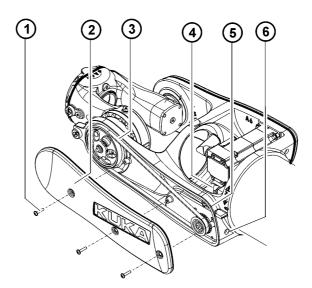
Measuring and adjusting the toothed belt tension on axis 5
